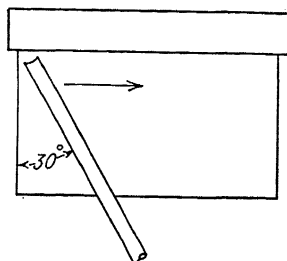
Overhead fillet weld. The electrode points into the weld at a 30-deg. angle at all times.
